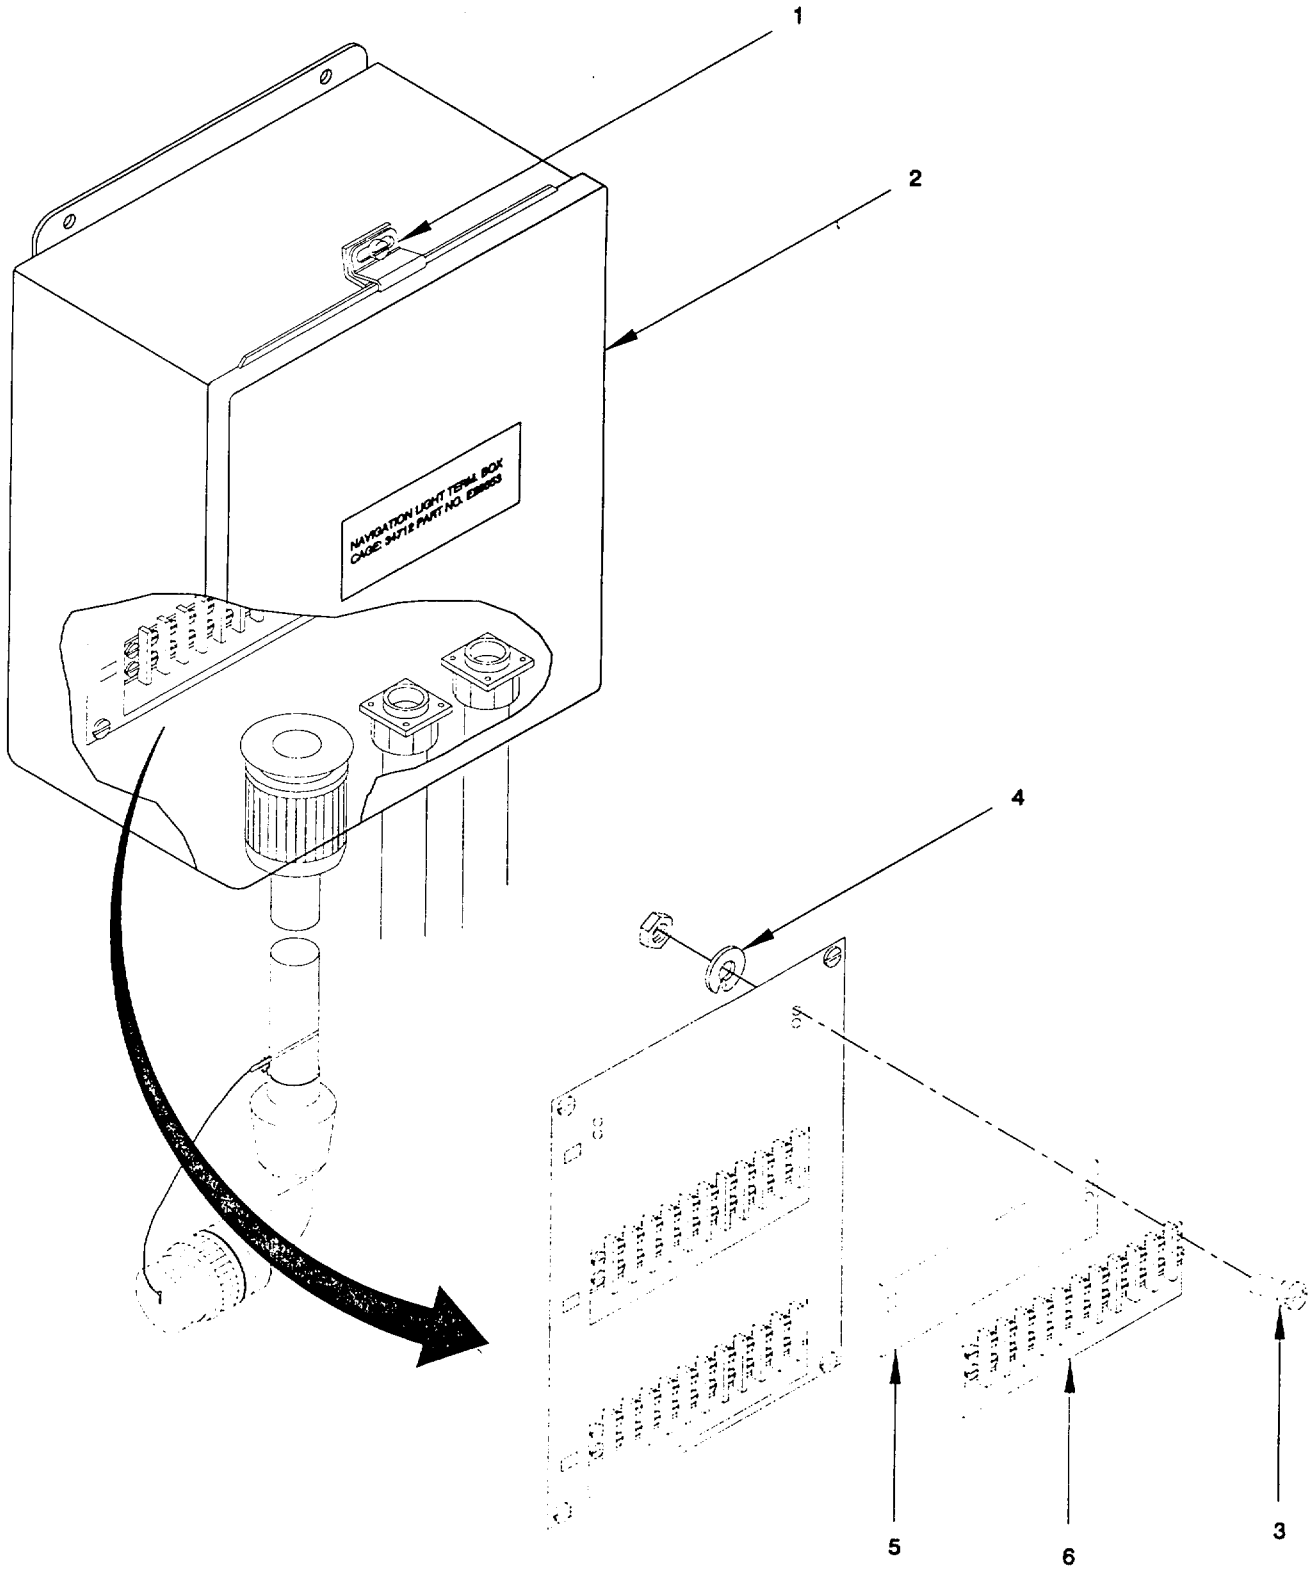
Terminal Block, Main Mast Navigation Assembly, Remove/Install.
